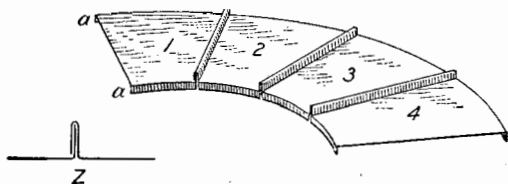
Showing Sections Locked Together and Forming One Side of the Elbow
